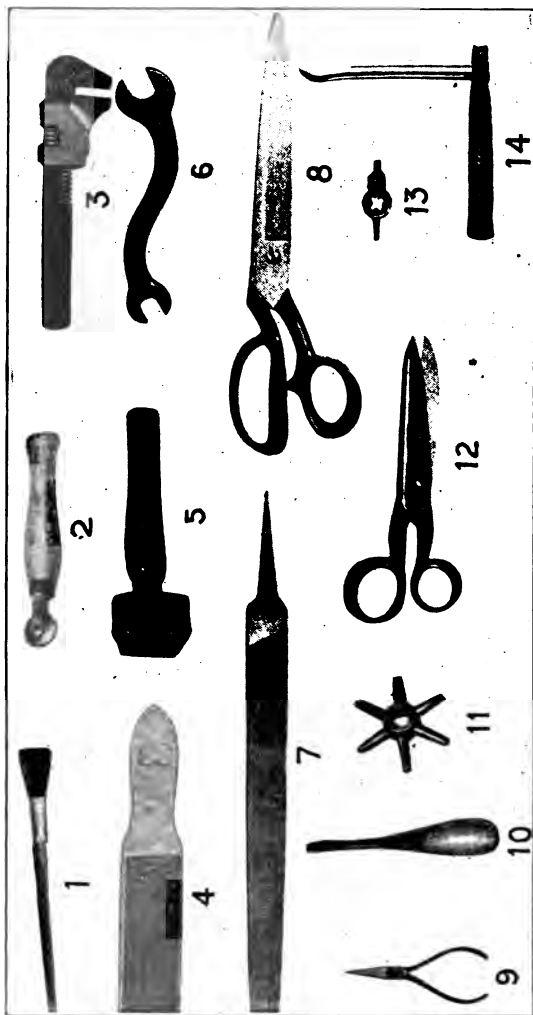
Tube repair tools. 1—cement brush. 2—stitcher. 3—wrench. 4—wire brush. 5—roller. 6—S wrench. 7—flat file. 8—scissors. 9—pliers. 10—screw driver. 11—star wrench. 12—curved shears. 13—valve tools. 14—socket wrench.
